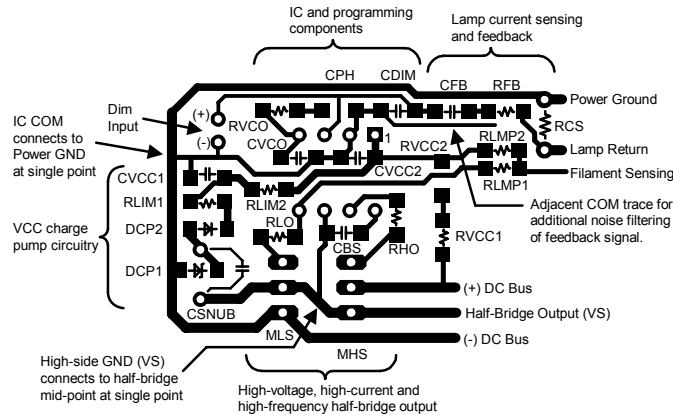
, Typical through-hole and SMD single-layer PCB layout for Application Diagram, Page 1 (bottom copper layer shown from top view).
